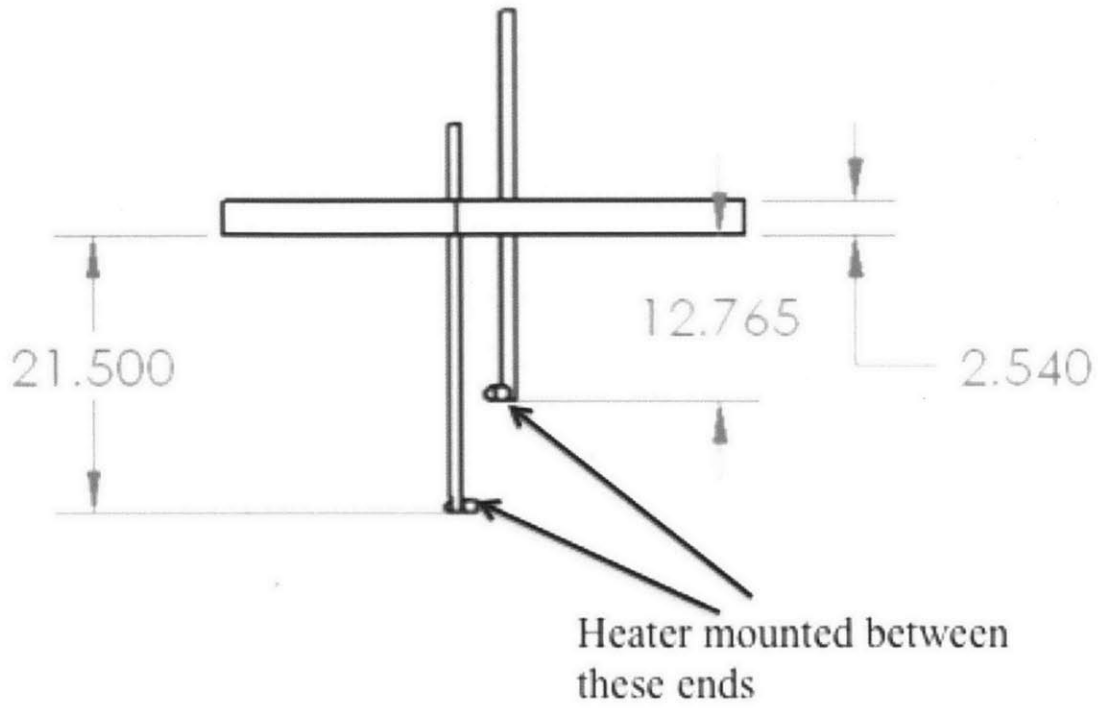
The side view of the lid with the Cu-electrodes, showing the positions of the electrodes when the heater is mounted between them (dimensions in cm)
